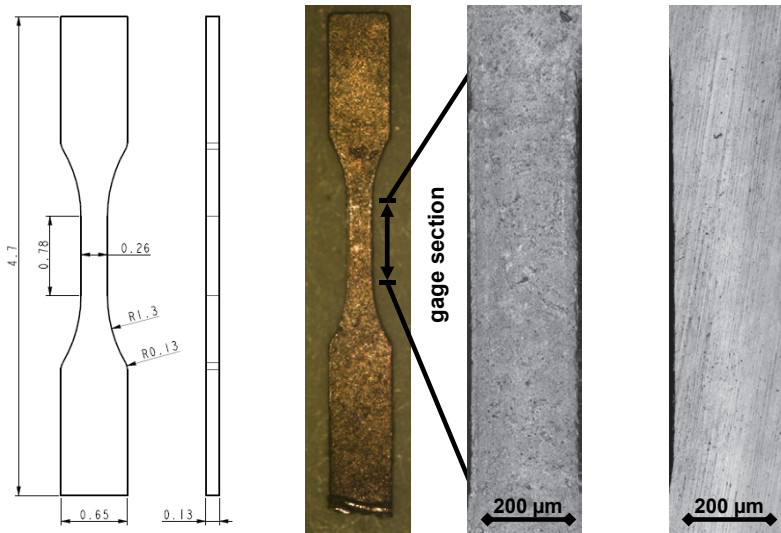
Tensile samples made of aluminum bronze: (From left to right) Drawing with dimensions shown in front and profile view; as-cast sample in the optical microscope and its gage section observed in the confocal laser microscope; polished gage section observed in the confocal laser microscope.
